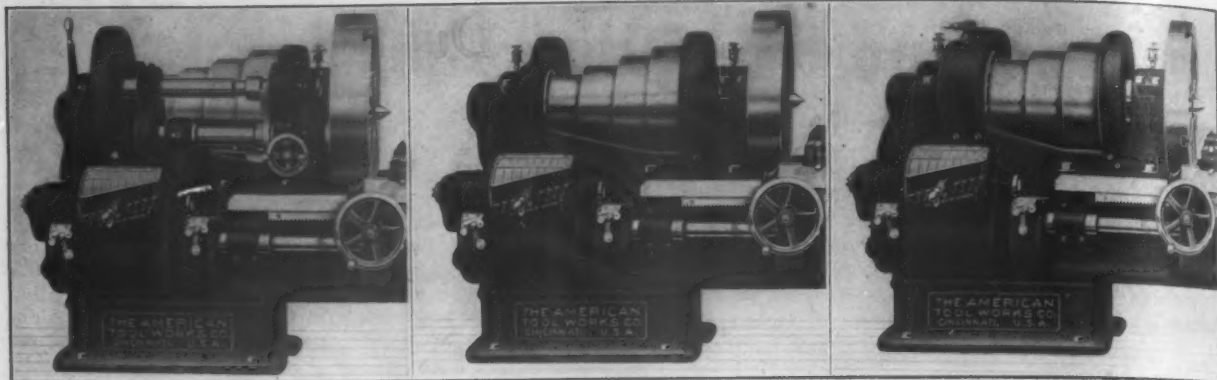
The Four-Step Cone Pulley Triple Geared Head. Fig. 4—The Four-Step Cone Pulley Single Back Geared Head. Fig. 5—The Three Step Cone Pulley Double Back Geared Head. Various Types of Heads with which These Lathes Can Be Equipped.
